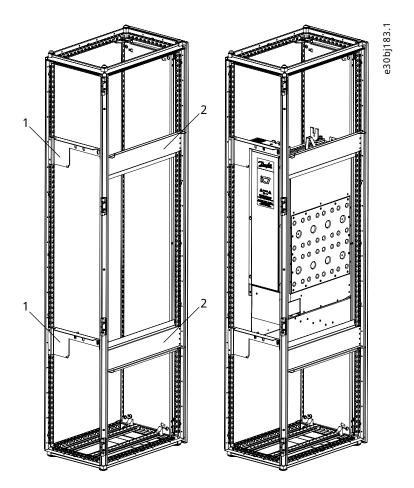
Mounting on the Mounting Brackets, IM10, IM11, AM10, AM11
